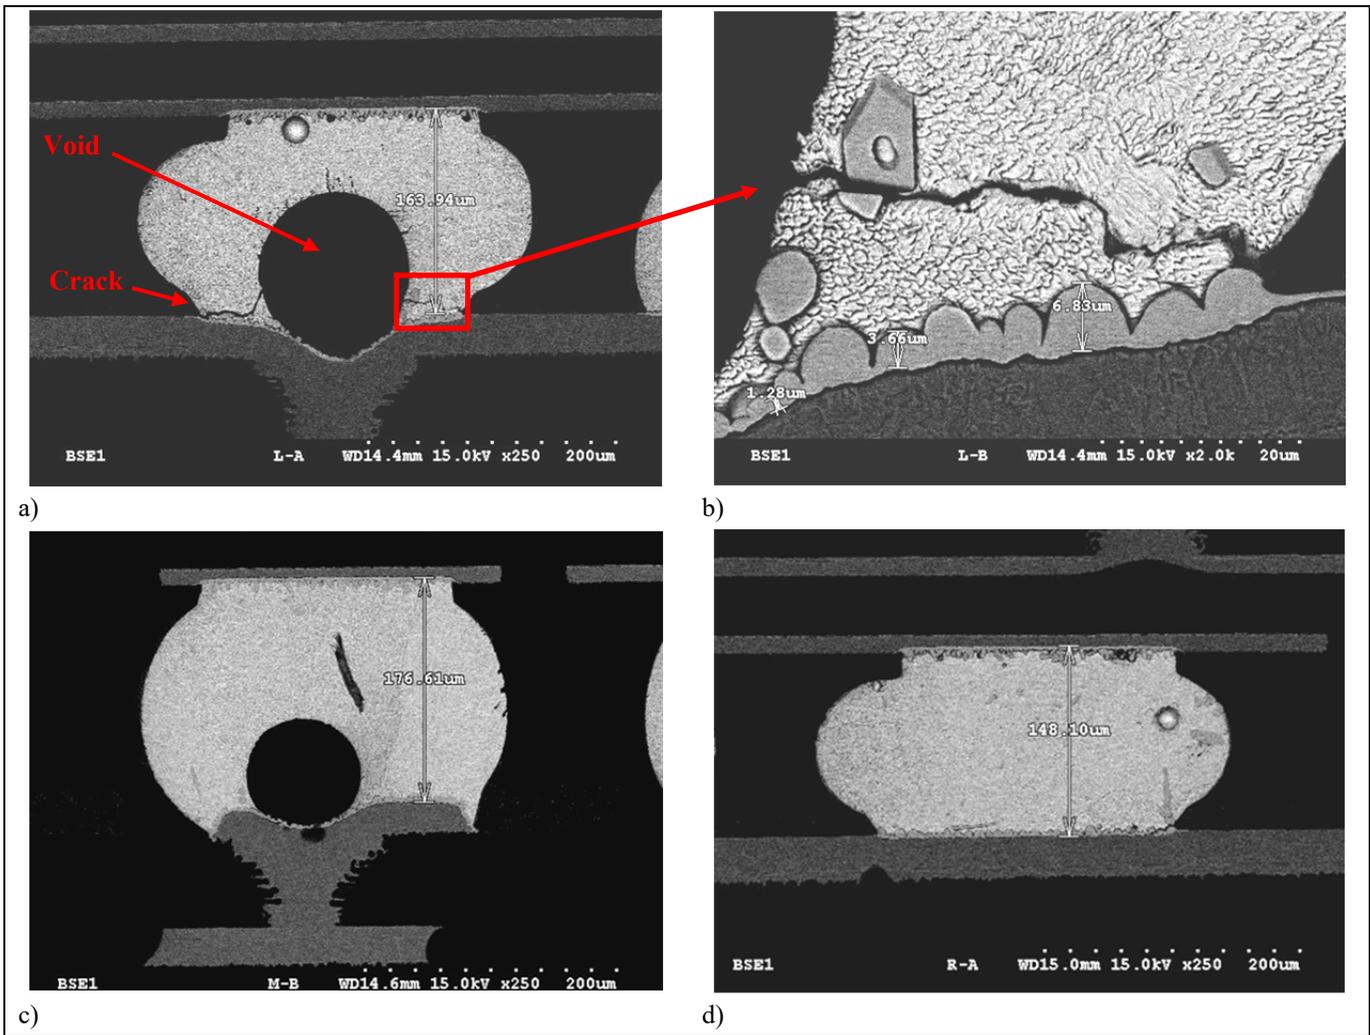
Micromorphology of Some Representative Solder Joints in the Bottom Layer
